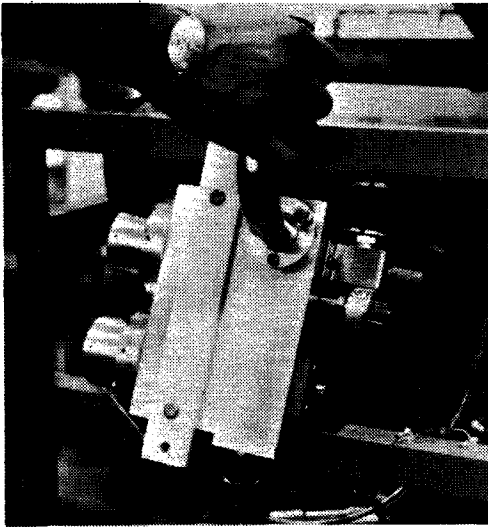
Lifting Valve Block Assembly Clear of Frame
